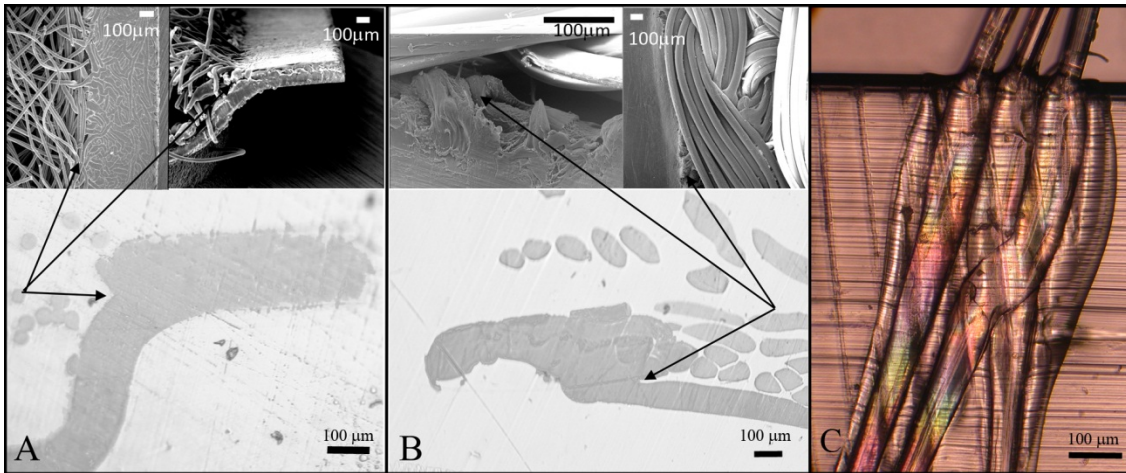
A) Non-woven-plate weld seam, B) knit-plate weld seam and C) polarized microscope picture showing the weld seam for the single filaments used in the tensile testing. Starting point of the weld seam is marked with arrows.
